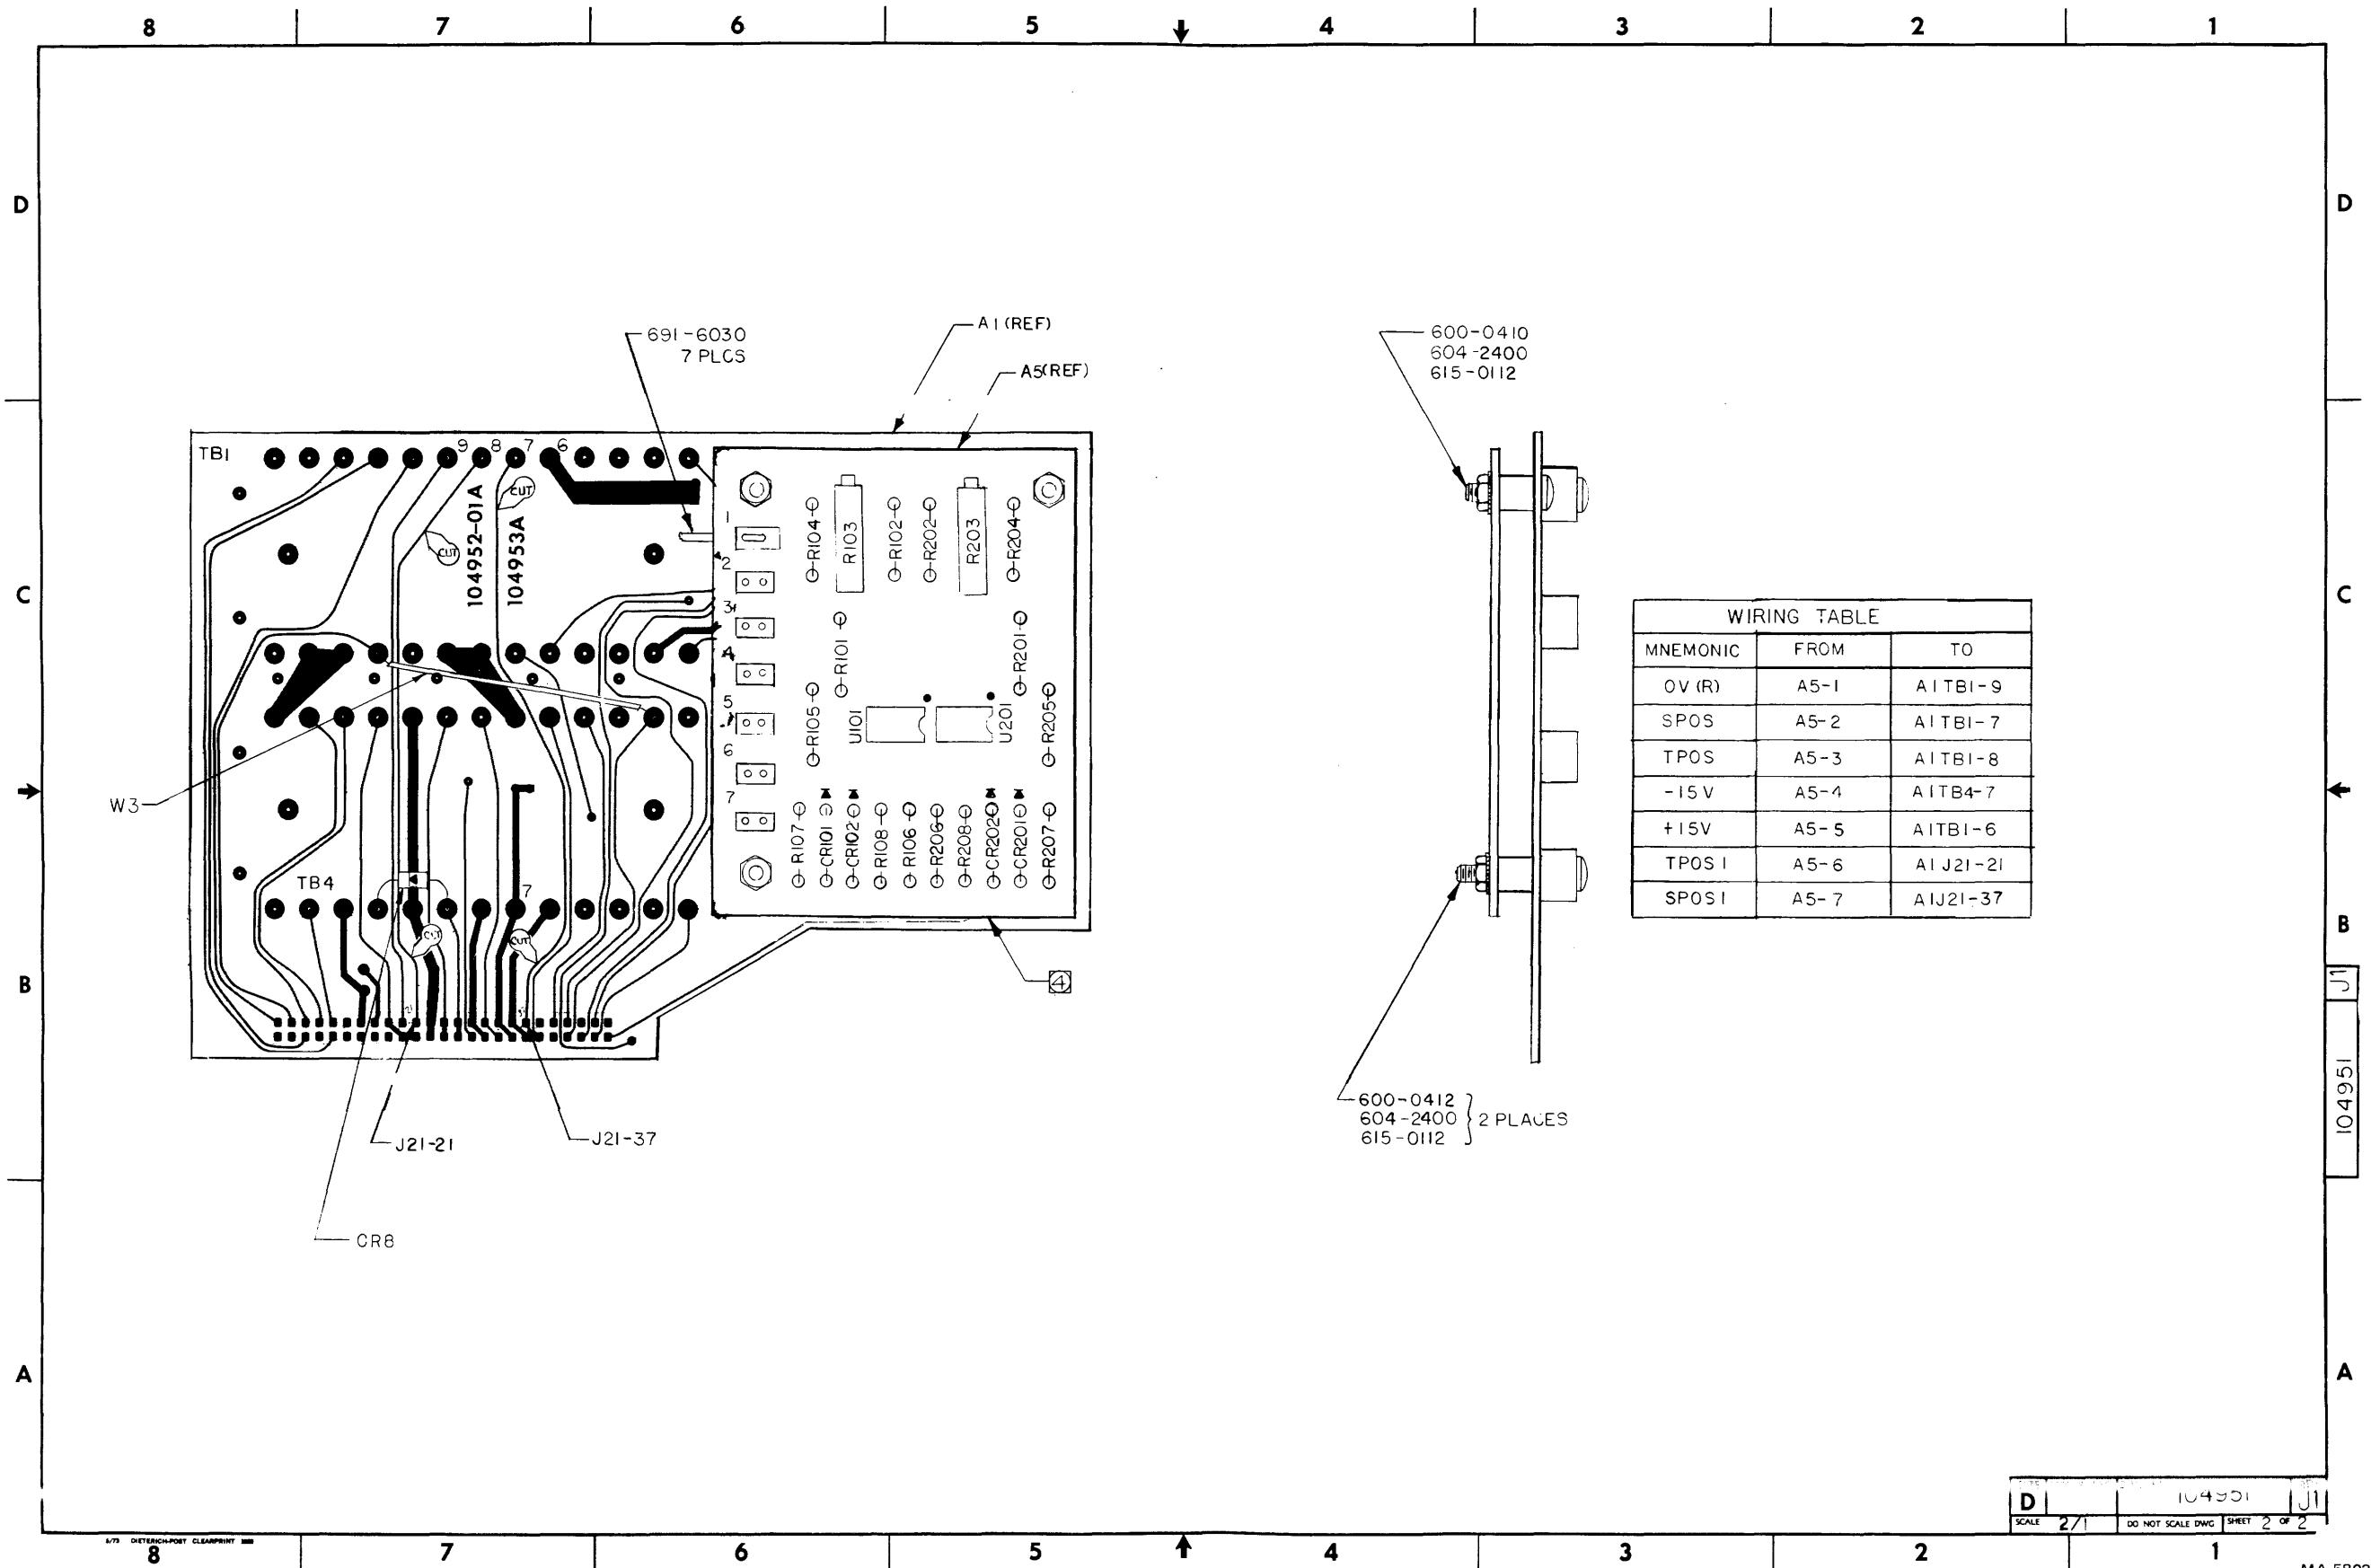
PCBA, Interconnect F (Sheet 2 of 2)
